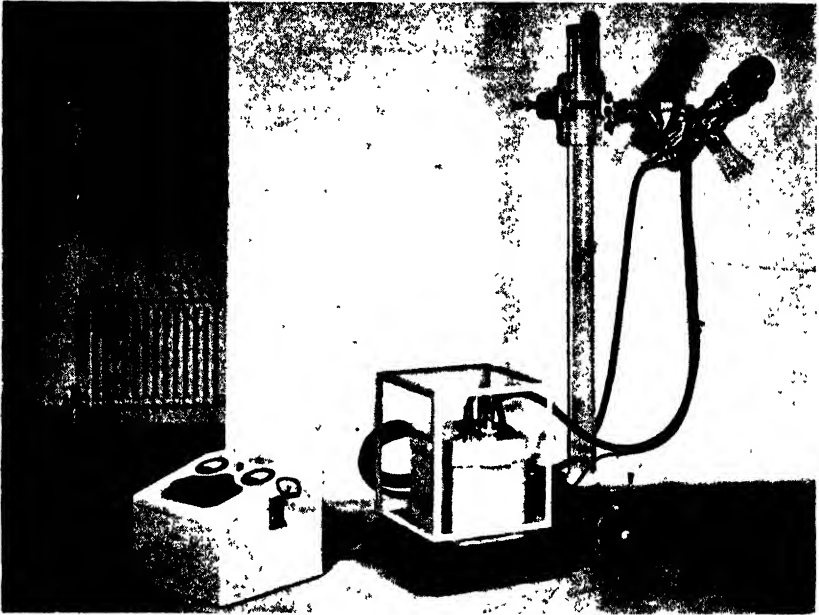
THE PHILIPS "MACRO 100" X-RAY EQUIPMENT
